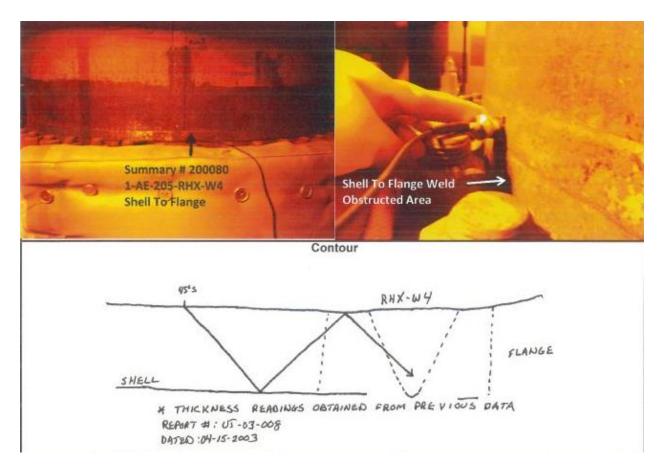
Weld 1-AE-205-RHX-W4 (Weld Profile) Weld Thickness and Contour
